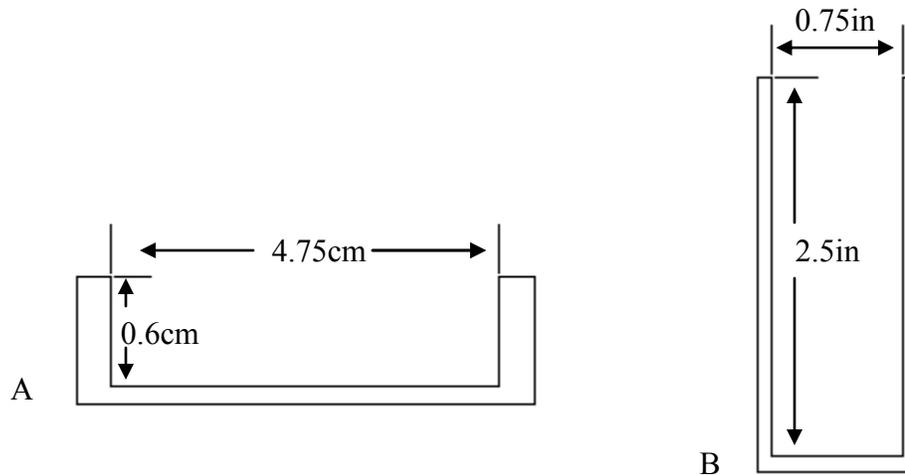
Drawing and dimensions of A) Rheometer cup and B) Copper Capsule
